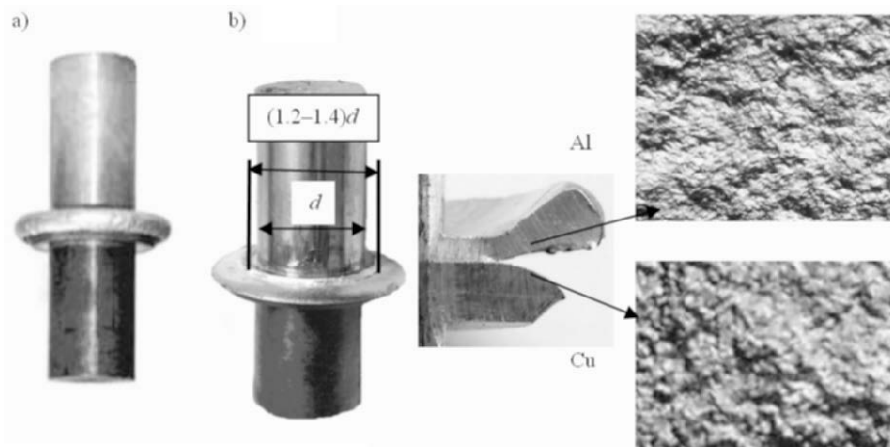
Cold pressure welding: a) obtained sample with flange and b) flange structures in unwelded points Al and Cu on the flange periphery were separated manually by means of a wedge shaped tool
